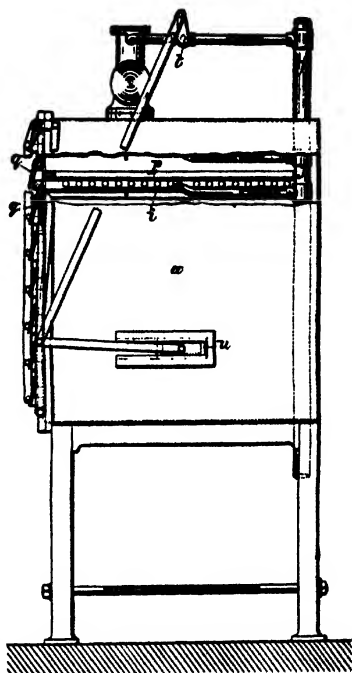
Steam-heated Vacuum Tea Drying Machine, with Sliding Shelves or Trays (sectional side elevation).
